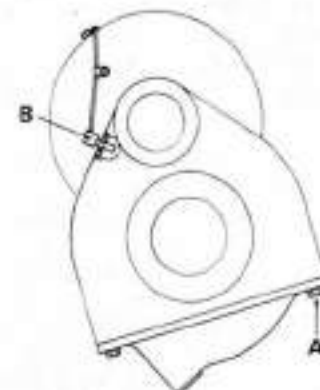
/12. VIEW OF LEFT-HAND REDUCTION SHOWING BREATHER AND PIPE FITTED
